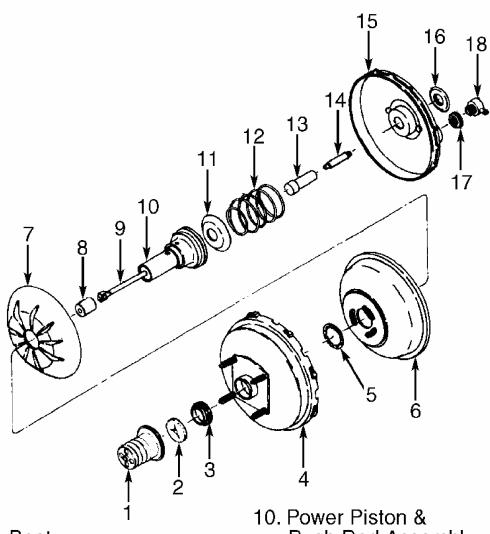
Exploded View Of Power Brake Booster (Dual Diaphragm) Courtesy of GENERAL MOTORS CORP.
